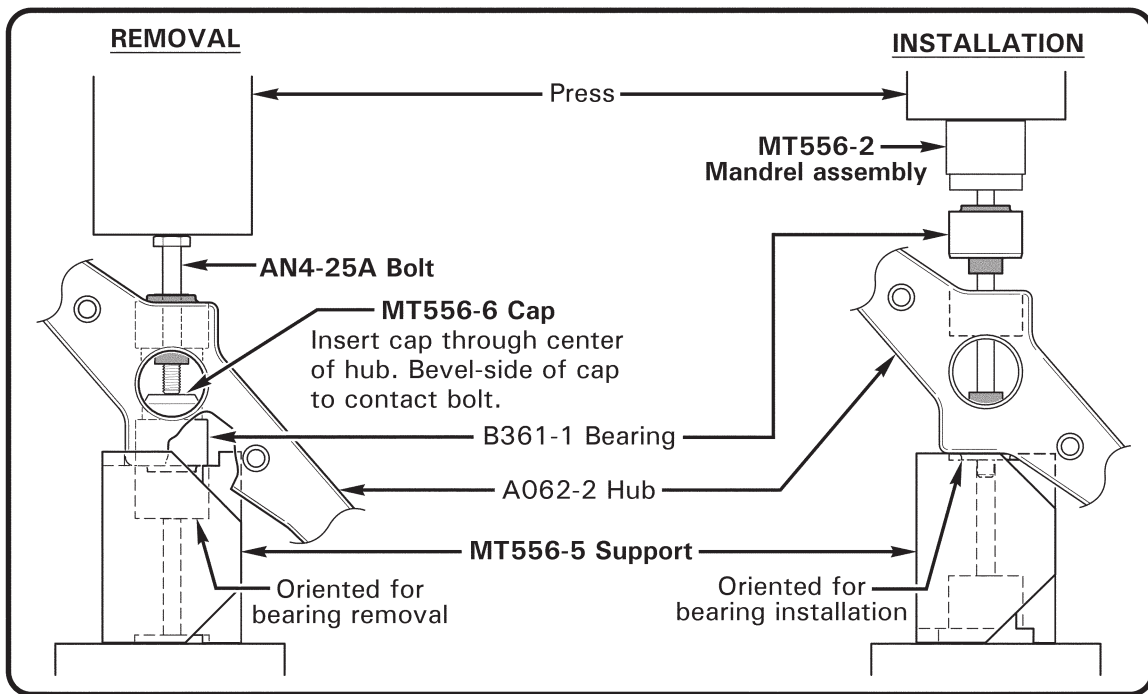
(EARLIER) MT556-1 (R22) TAIL ROTOR HUB BEARING REPLACEMENT TOOL KIT
